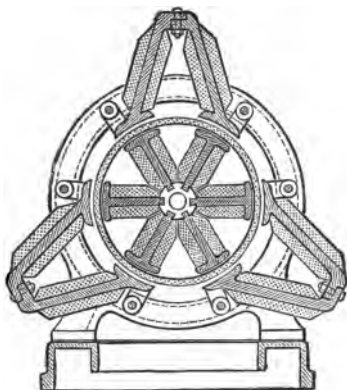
Section of the Elphinstone and Vincent Machine.
